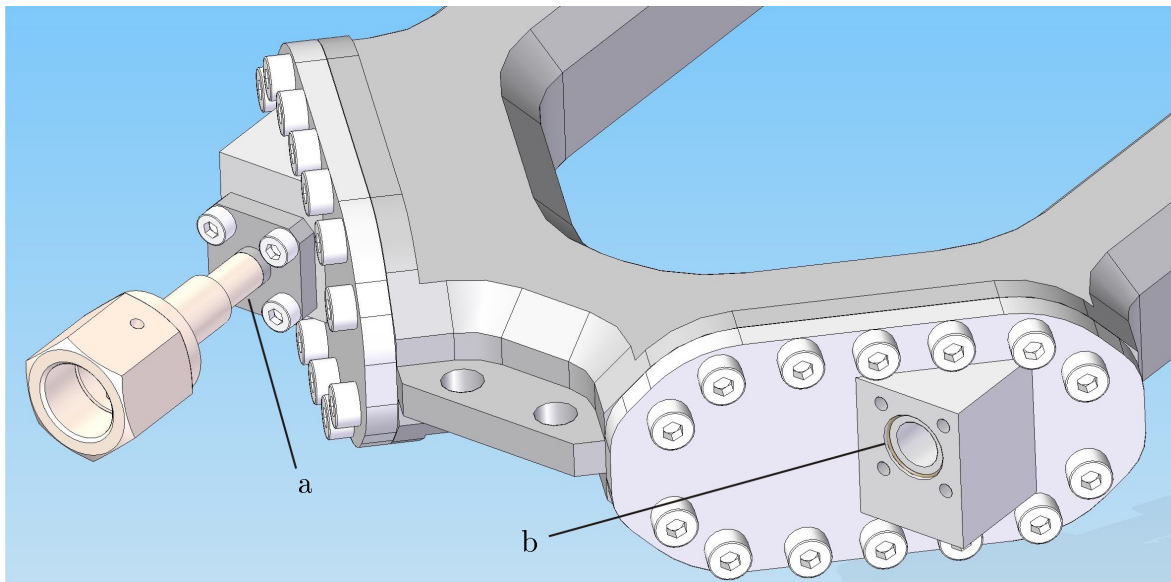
HTS coil cryogen couplings, a - mounted VCR coupling, b - indium sealing for the VCR coupling.
